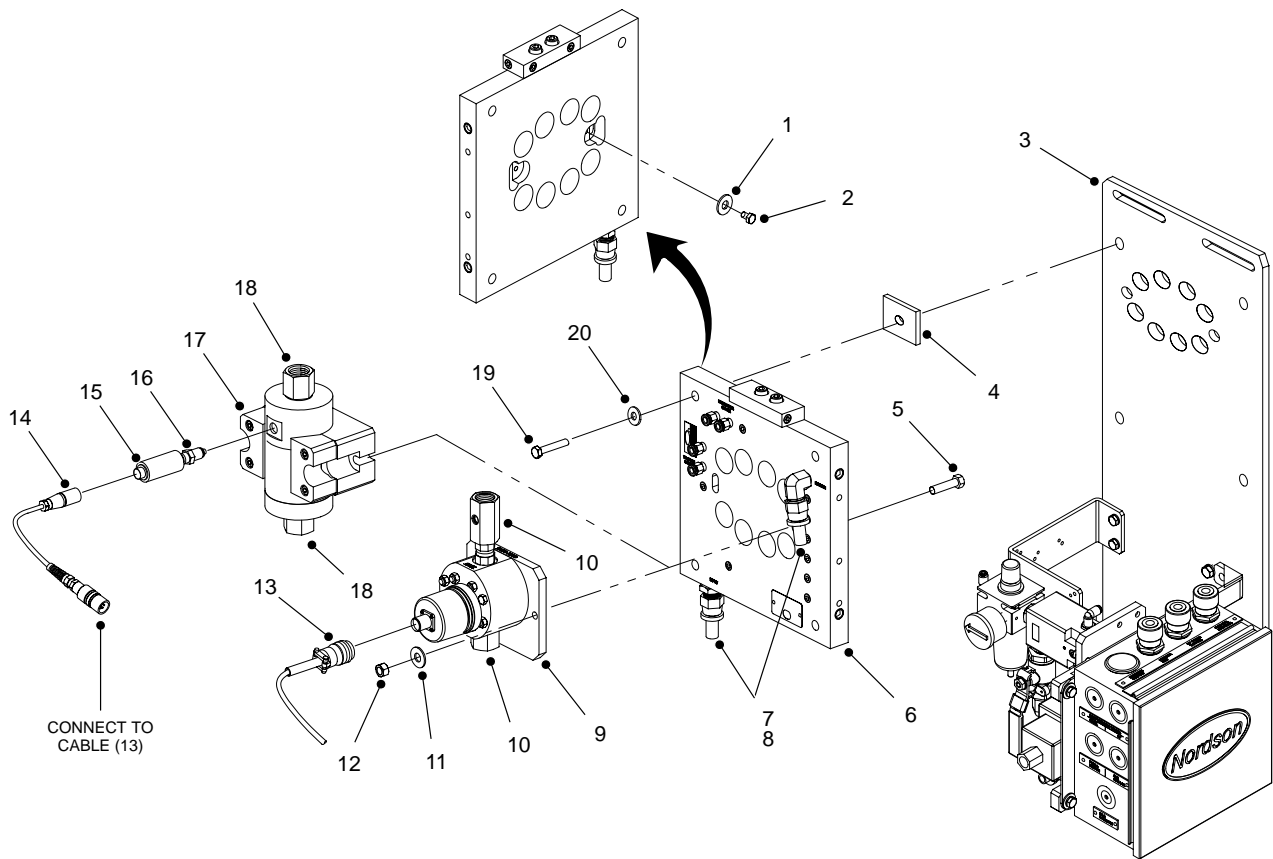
Typical Installation onto a Temperature Conditioned Flowmeter Assembly
